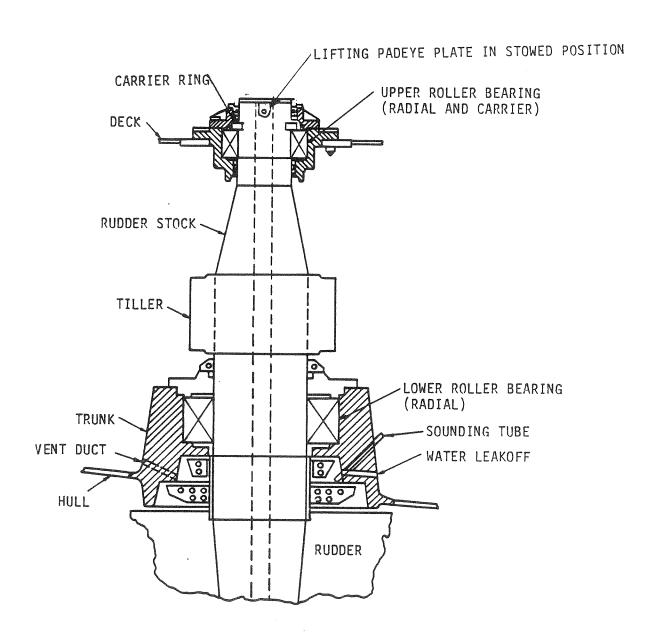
RUDDER STOCK BEARING TYPICAL ARRANGEMENT "D"
